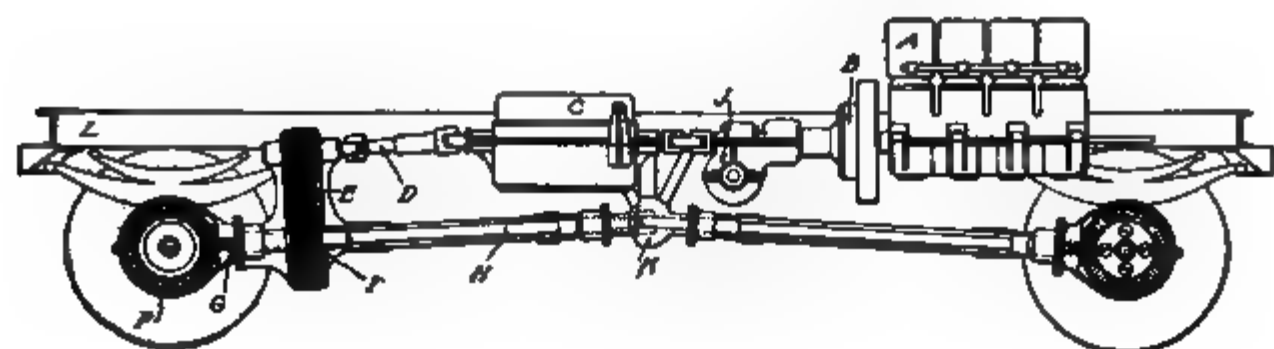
Side View of a Four-Wheel Drive, Steer, and Brake Motor Truck
